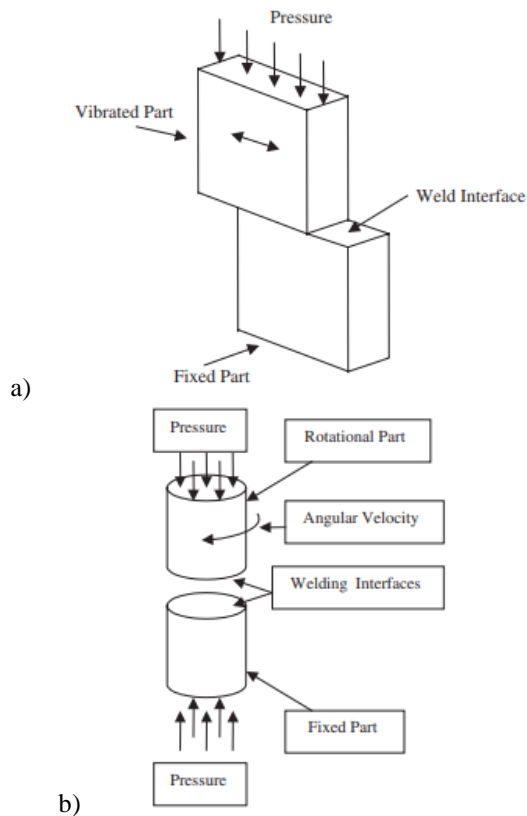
Schematic of a) linear vibration welding and b) spin welding [12]
